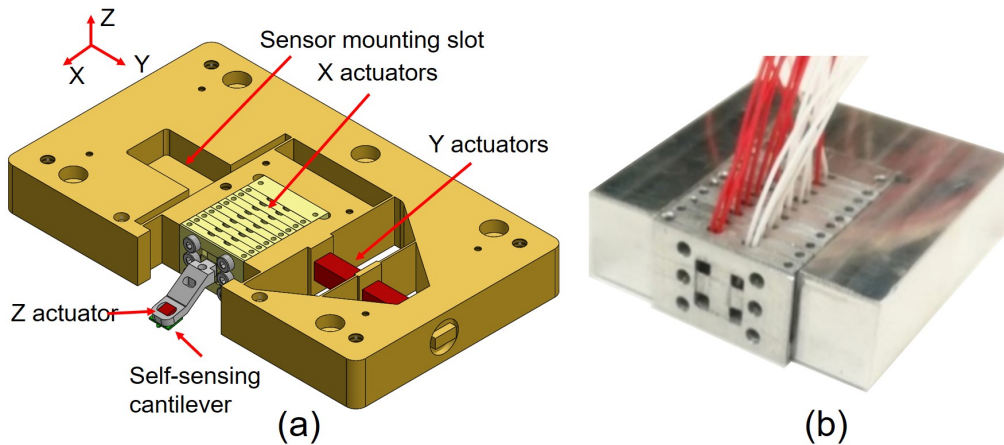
Assembly of multi-layer stacked scanner: (a) 10 layer  $X$  axis scanner assembly with  $Y$  and  $Z$  actuators, (b) assembled 10 layer stacked scanner  $X$  axis for testing
